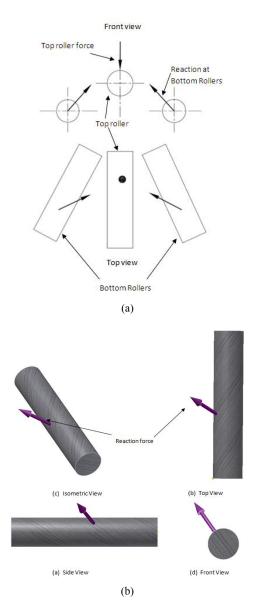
(a) Reactions at the bottom roller due to bending force on top roller, (b) Bottom roller with 3-dimensinal force pattern
